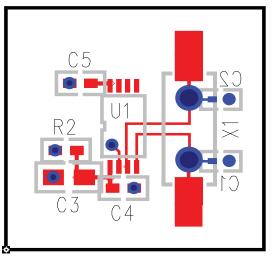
B. 844031-01 PC BOARD LAYOUT EXAMPLE
